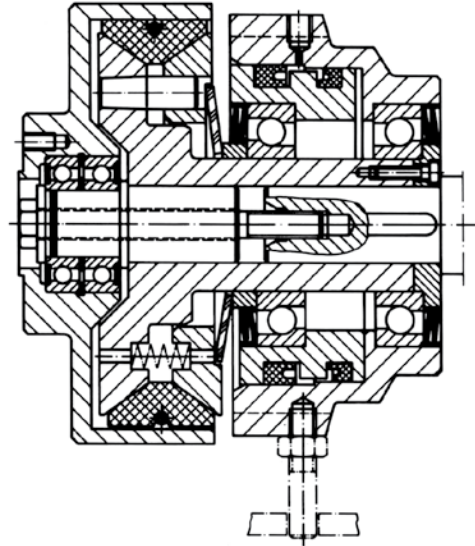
Conax® Friction Clutch type CHFR hydraulically actuated for universal joint
